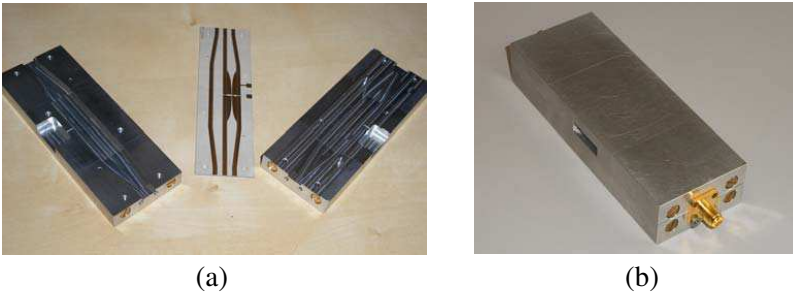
(a) Building blocks of the manufactured passive combiner. (b) Assembled prototype: the upper and lower metal halves and the substrate are stacked together.
